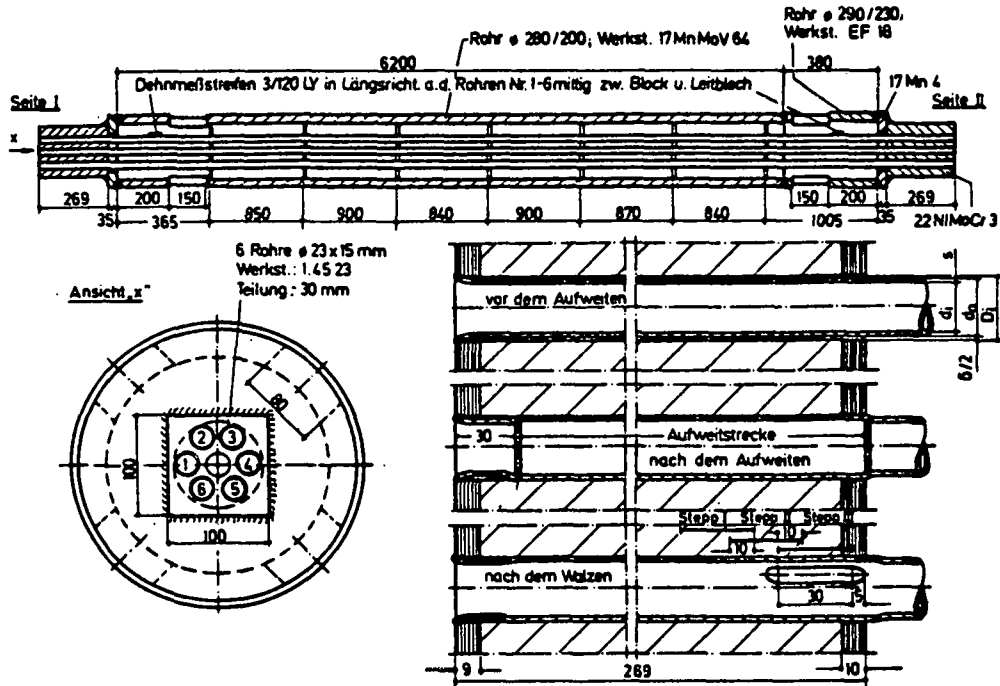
Test apparatus with two fixed tube plates. Tube 290 dia./230; EF 18 material Tube 280 dia./200; 17 MnMoV 64 material.
